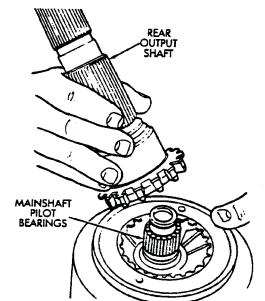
Install Rear Output Shaft And Mainshaft Pilot Bearings
